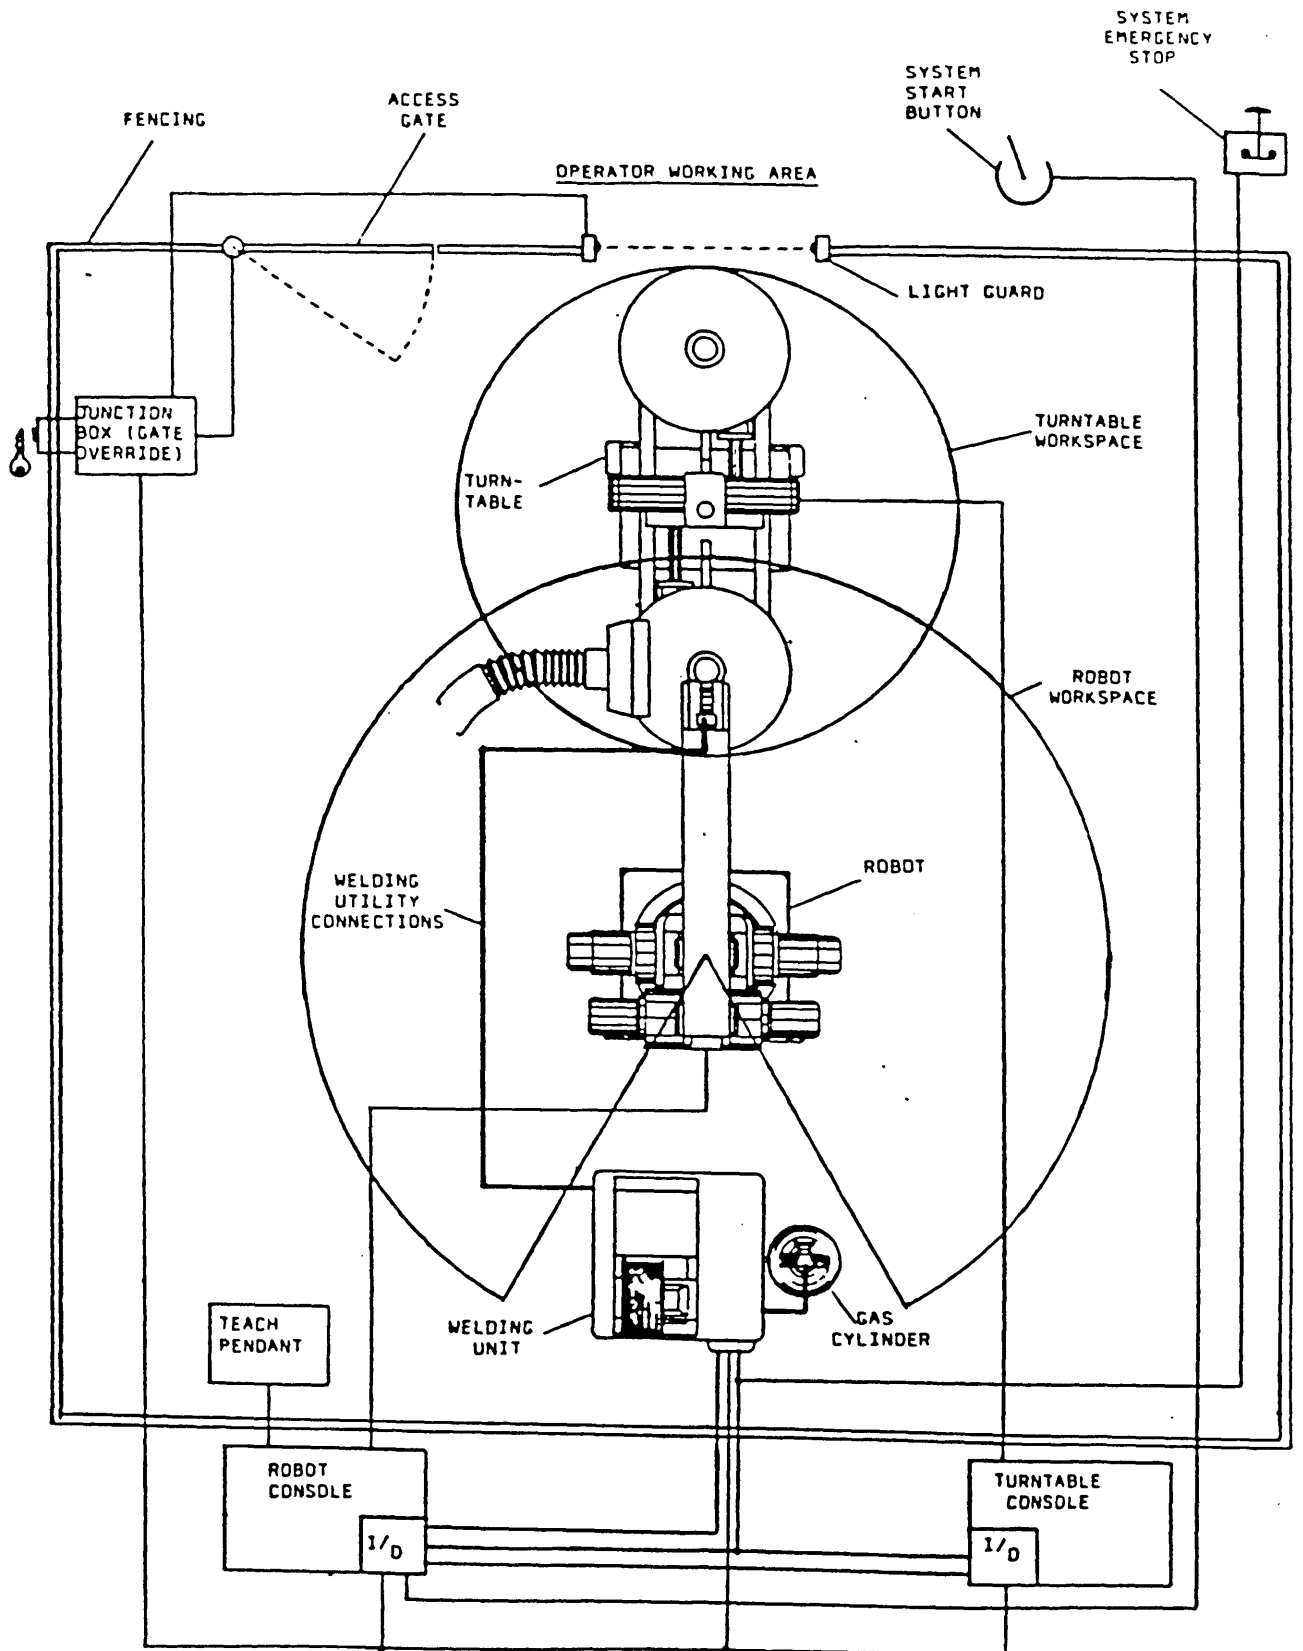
Robot Welding System Layout: Including Safeguards
